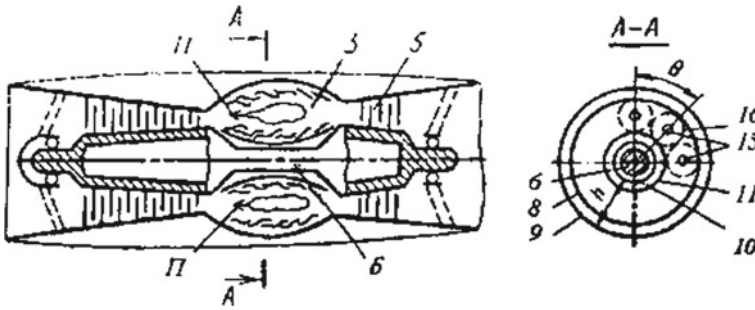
Design of the annular combustion chamber. 3—combustion chamber; 5—turbine; 6—shaft connecting the compressor rotor to the turbine rotor; 8—outer wall of the annular flame tube; 9—outer casing of the combustion chamber; 10—inner casing of the combustion chamber; 11—inner wall of the annular combustion chamber; 15—fuel injectors; 16—annular space
